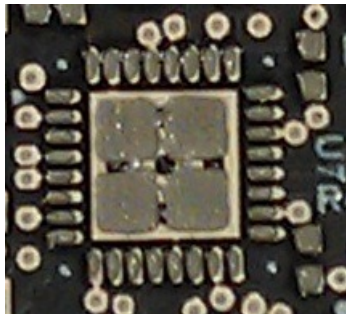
KybMo, TPS650250 pads after solder paste printing. The black spots on the thermal pad shows how the vias are tented with solder mask
